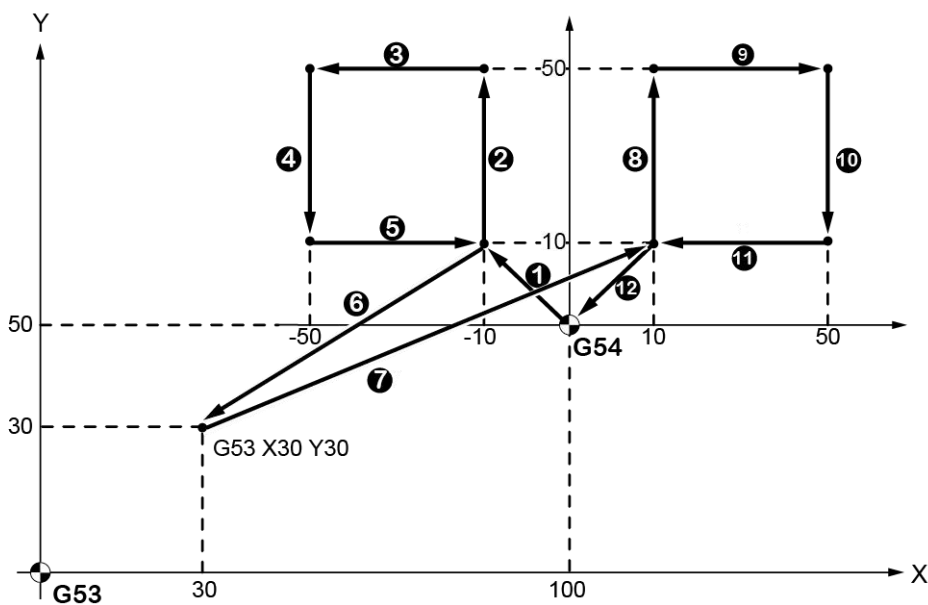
Program Legend of Machine Tool Coordinate System and Workpiece Coordinate System
